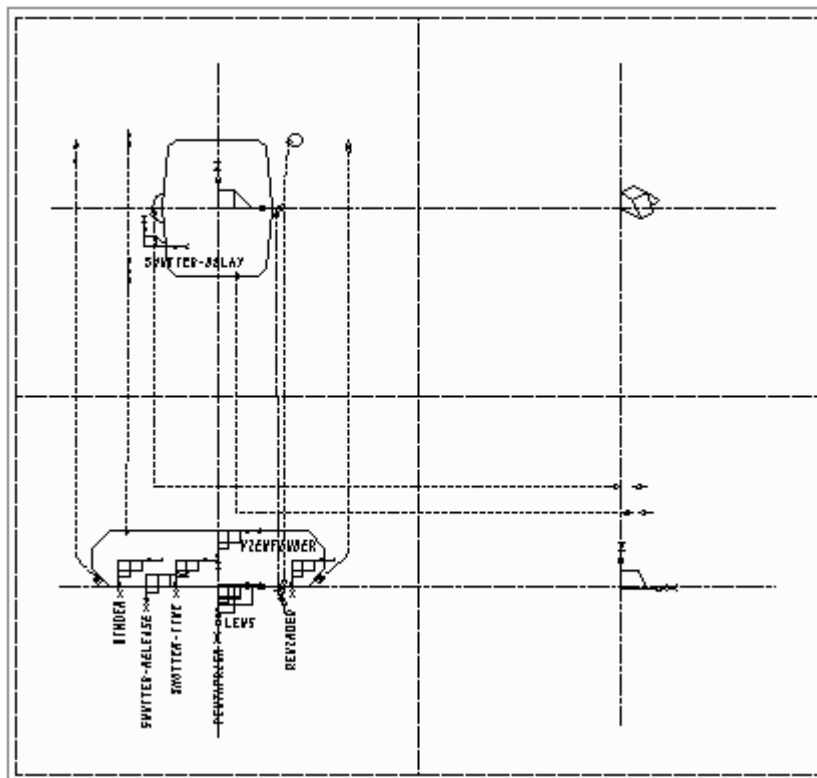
Enlarged View Of the XY Viewbox On the Assembly Sheet
